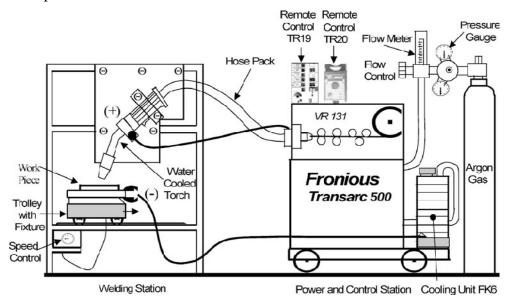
11- Equipments of MIG/MAG Welding. [K]
